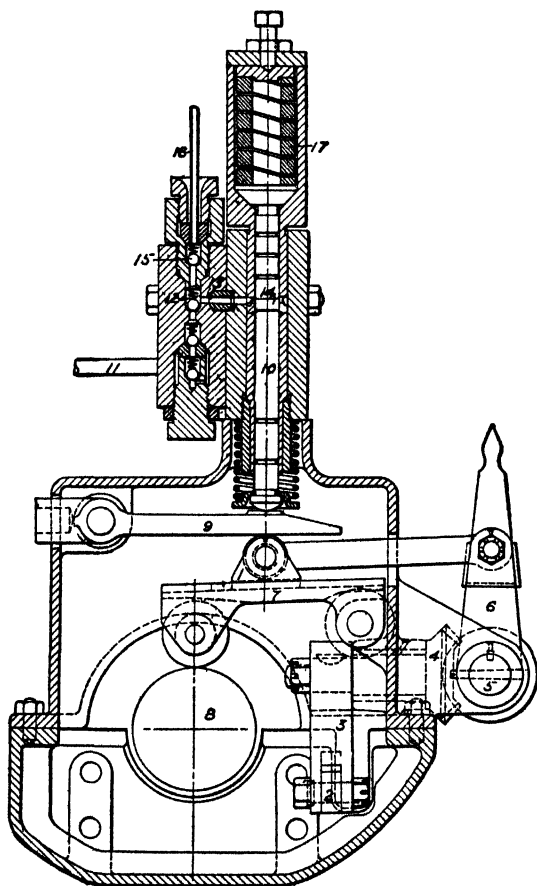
Fuel Pump of Baldwin-Knudsen Diesel Locomotive Engine
